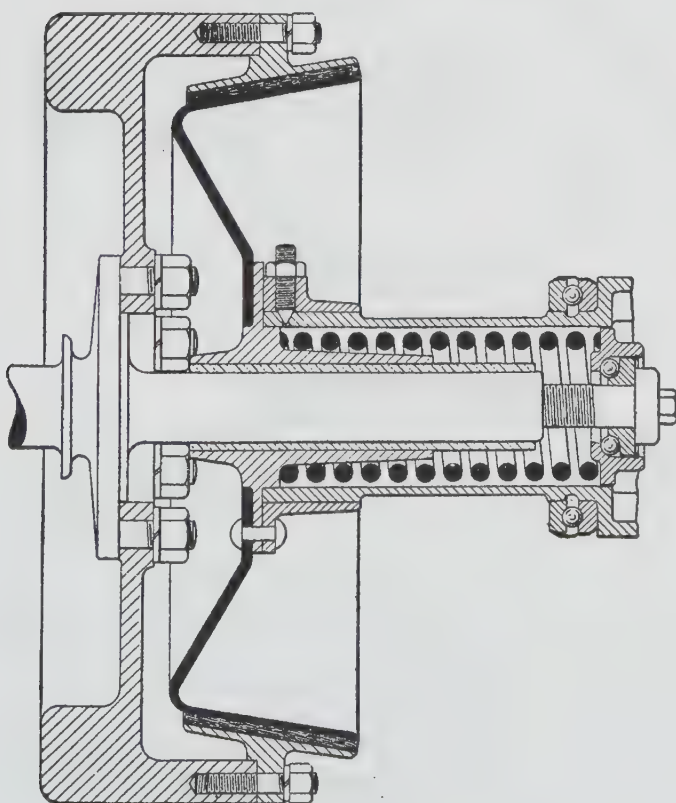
PRESSED STEEL CONE CLUTCH.
